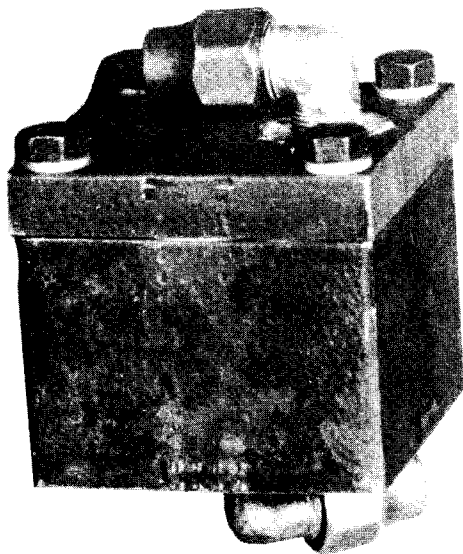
AUTOMATIC HIGH PRESSURE VACUUM VALVE
